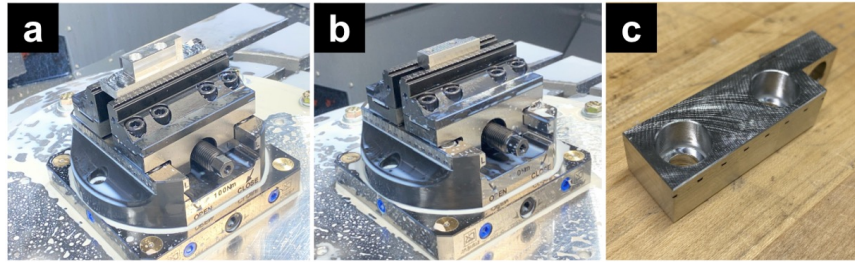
Pusher machining showing (a) first setup after machining, (b) second setup after machining, and (c) the resulting pusher.
